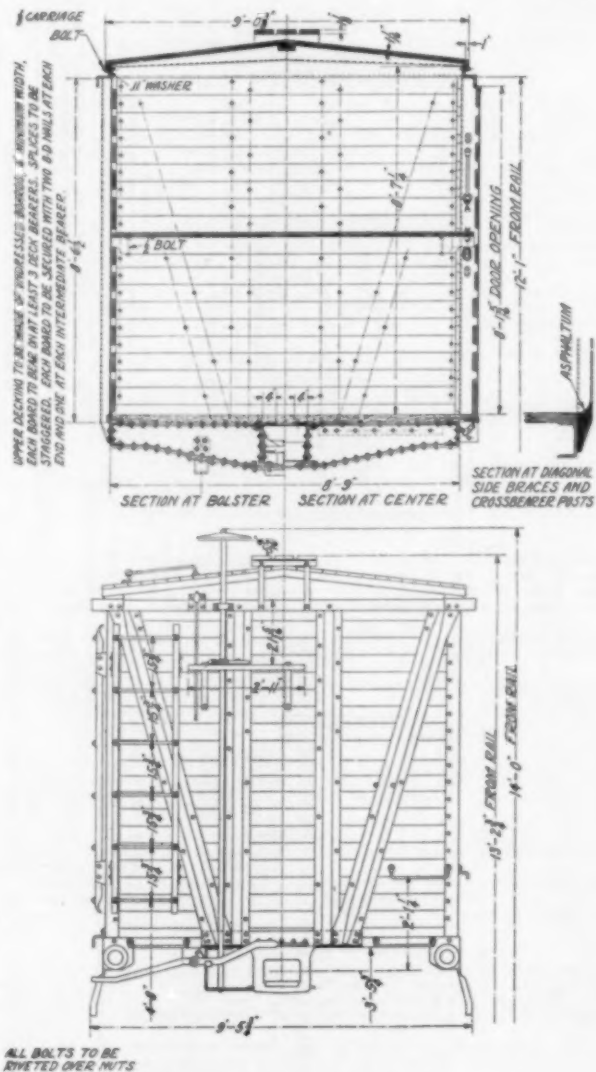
End Elevation and Cross Section of Proposed Standard Stock Cars
